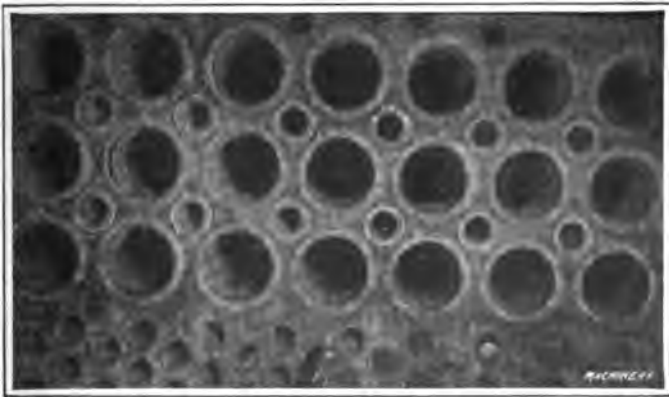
Patch shown in Fig. 34 after being welded in Place
